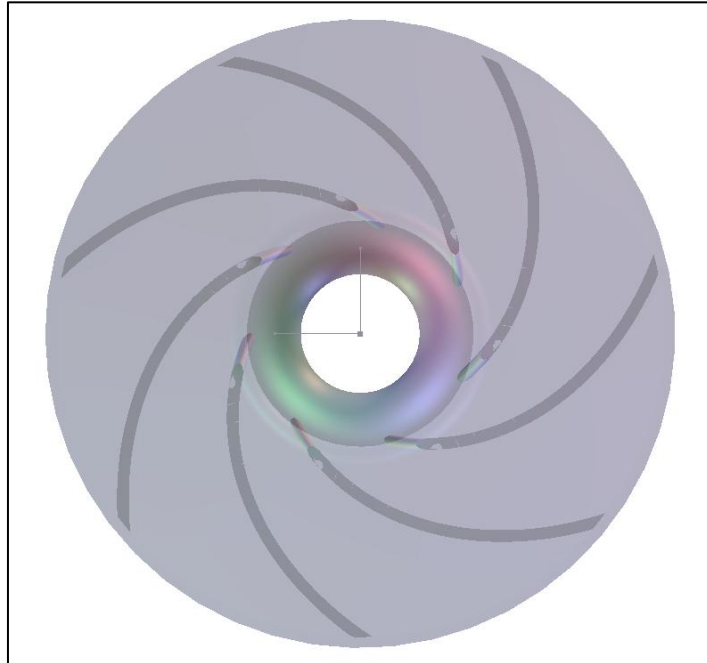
Frontal view of the original impeller reconstructed with Blade Gen.
